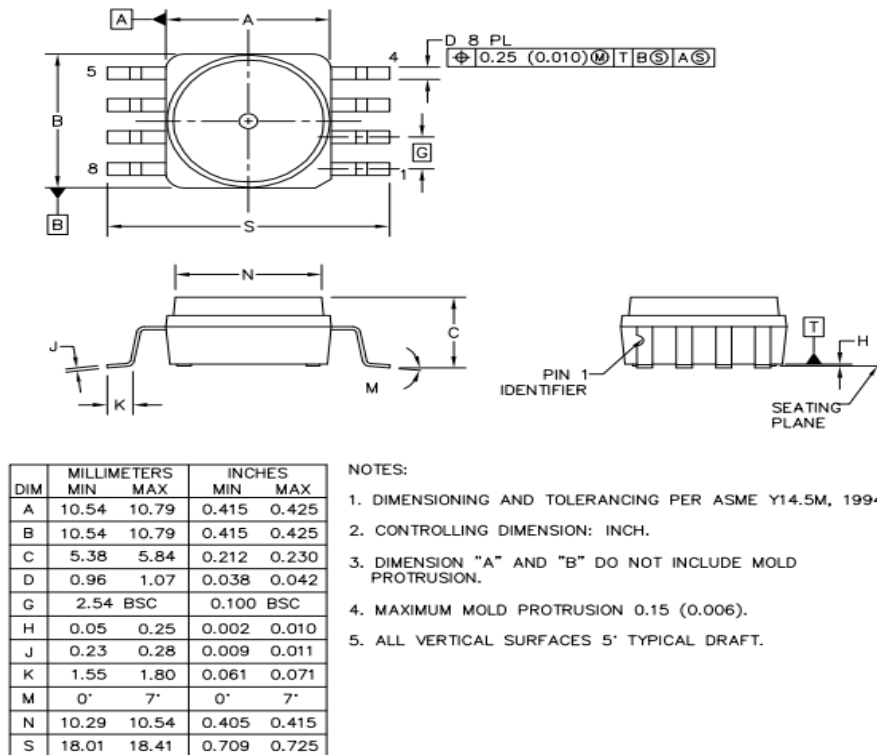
Dimensional drawings of the Pressure Sensor
